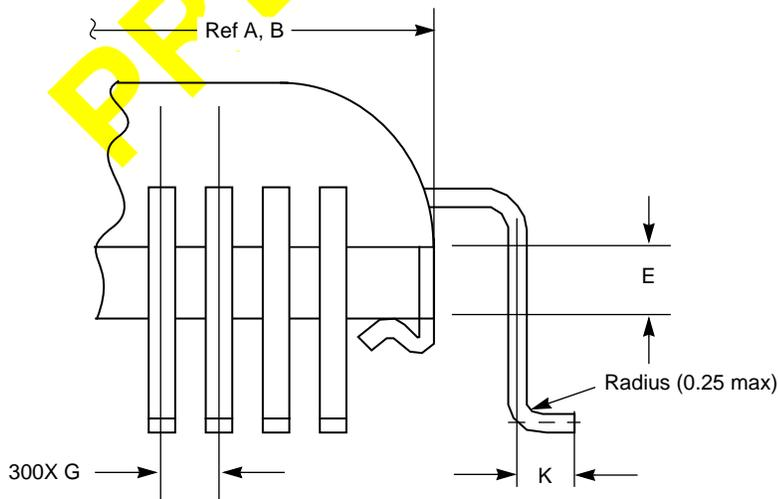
IBM C4-CQFP Mechanical Dimensions—View P
